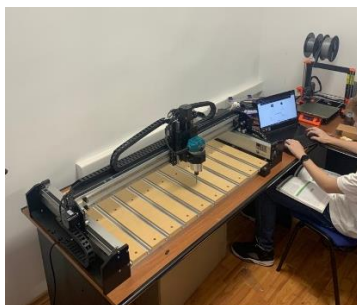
The CNC machine and one 3D printer used in the manufacturing process.
